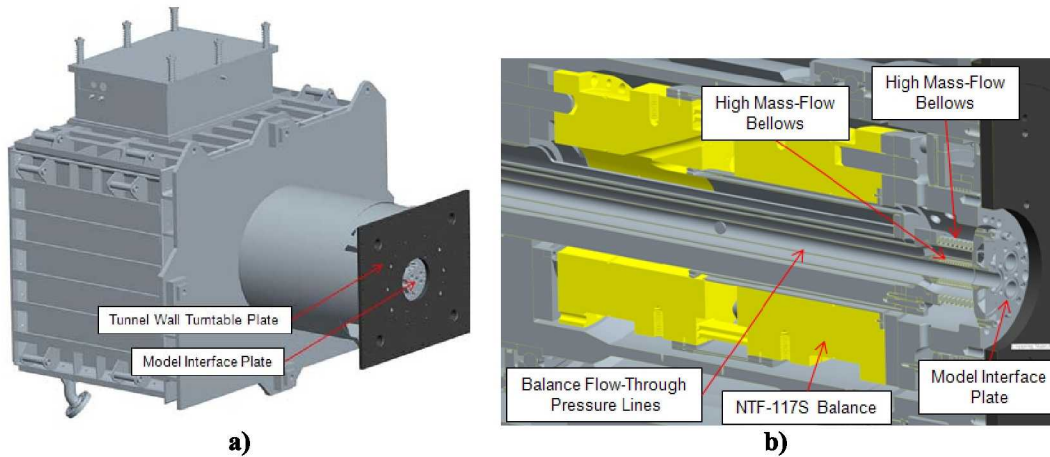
a) NTF SMSS, b) Cross sectional view of SMSS showing NTF-117S balance, bellows configuration, and model attachment/interface plate
